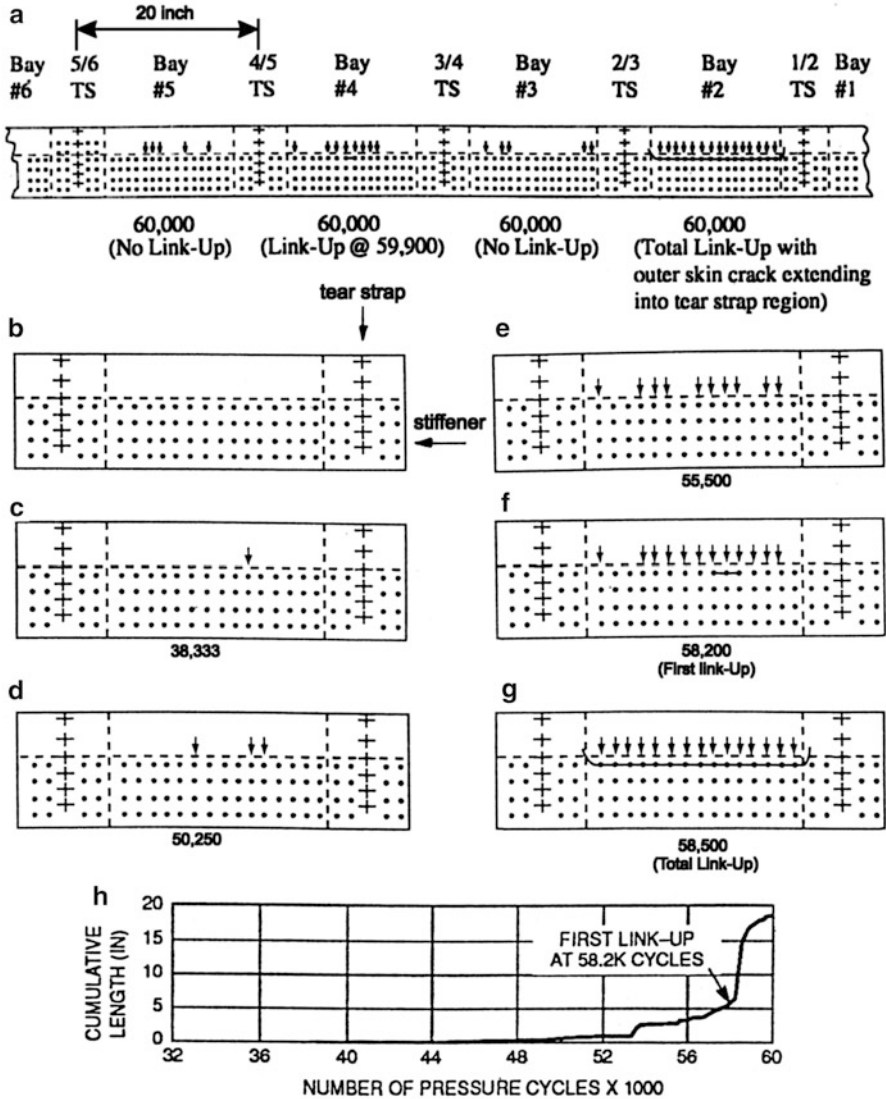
Fatigue tests of a longitudinal riveted lap splice joint in the Boeing 747-400 fuselage panel: (a) schematic of the joint; (b) joint in bay 2 of the panel; (c–g) locations of outer skin fatigue cracks identified during visual inspections; (h) cumulative crack length (Piascik and Willard 1997)
